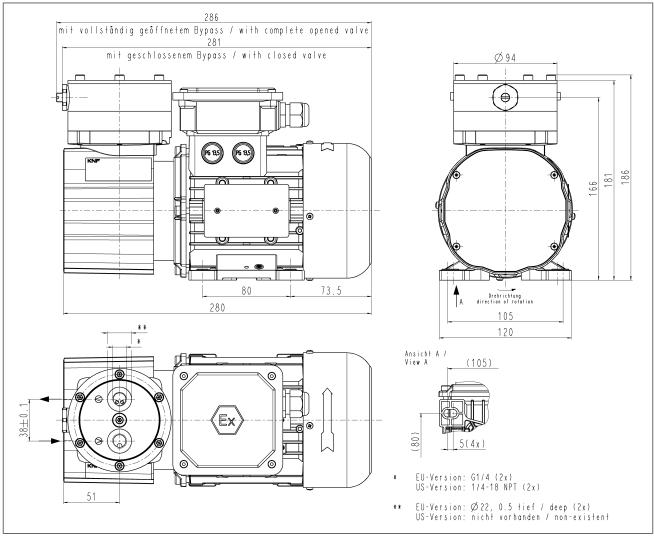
Mounting dimensions of N922FT.29E EX (three-phase motor)
